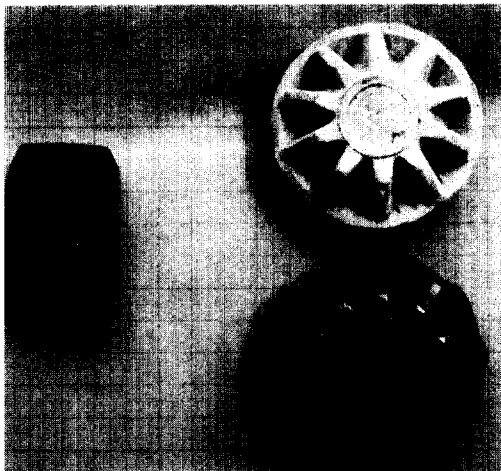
Examples of bevel gear produced by rotary forging(upper : plasticine, lower : SM6C)
